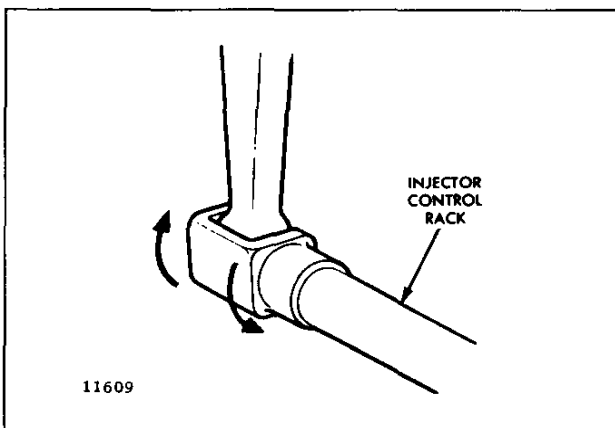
Checking Rotating Movement of Injector Control Rack
